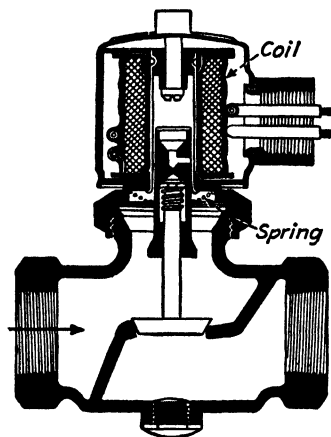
Single solenoid valves have only two positions, open and closed.
